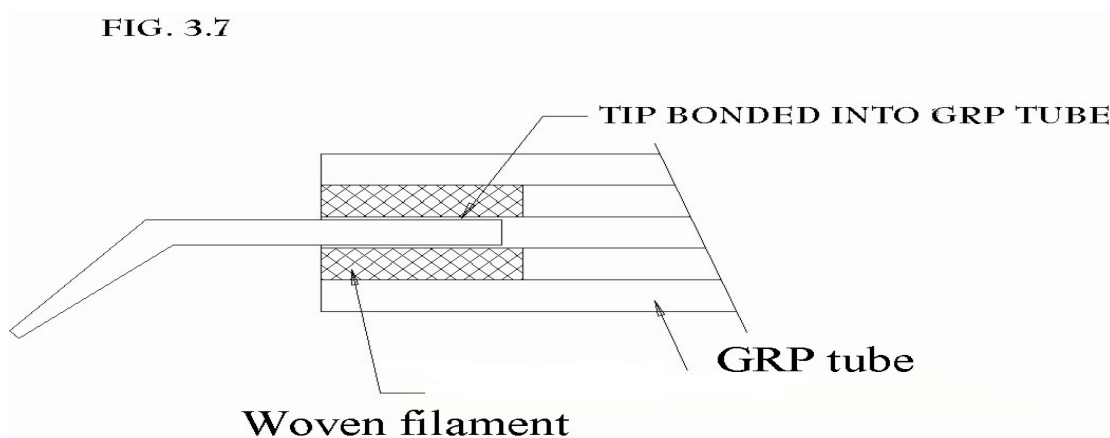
Layout of connection between steel bit and fibreglass tube.
